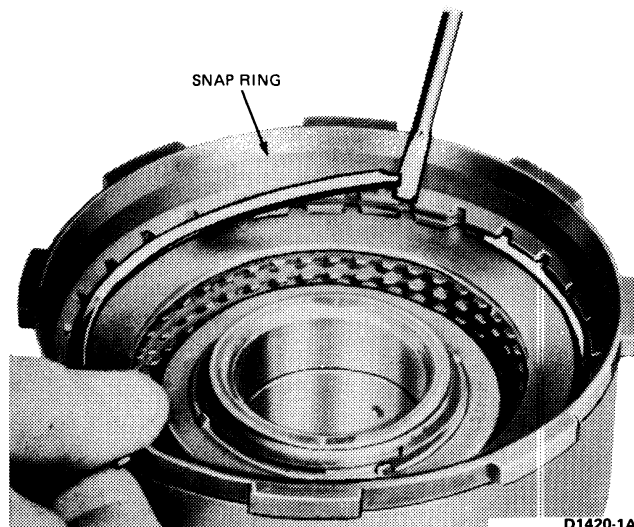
Removing or Installing Reverse-High Pressure Plate Snap Ring
